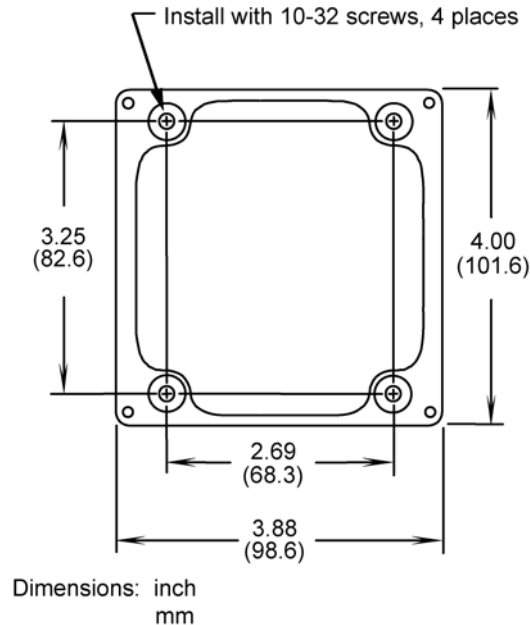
One-hand Control Switch Base: Mounting Dimensions
